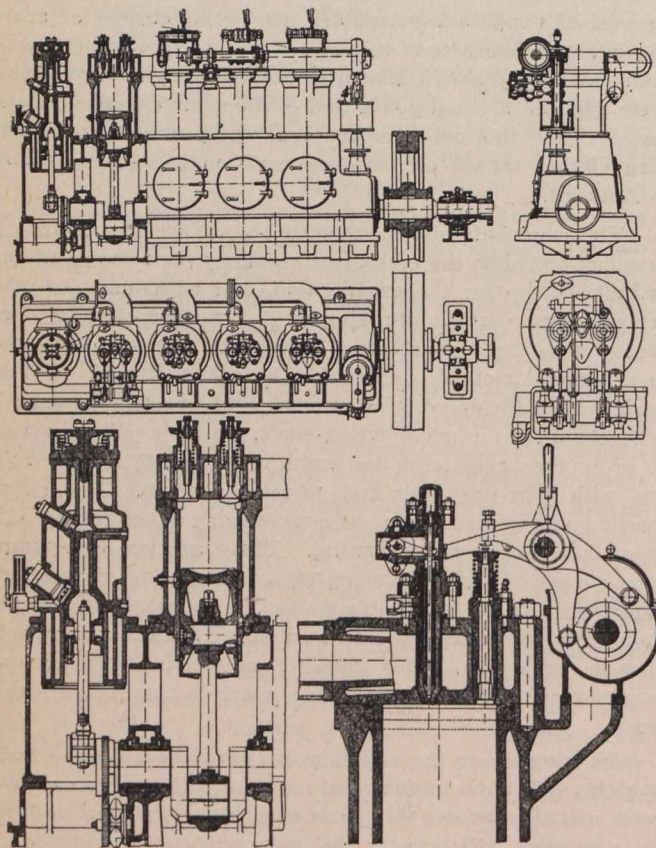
Details of 200 Horse-power Four-cycle Diesel Engine.
